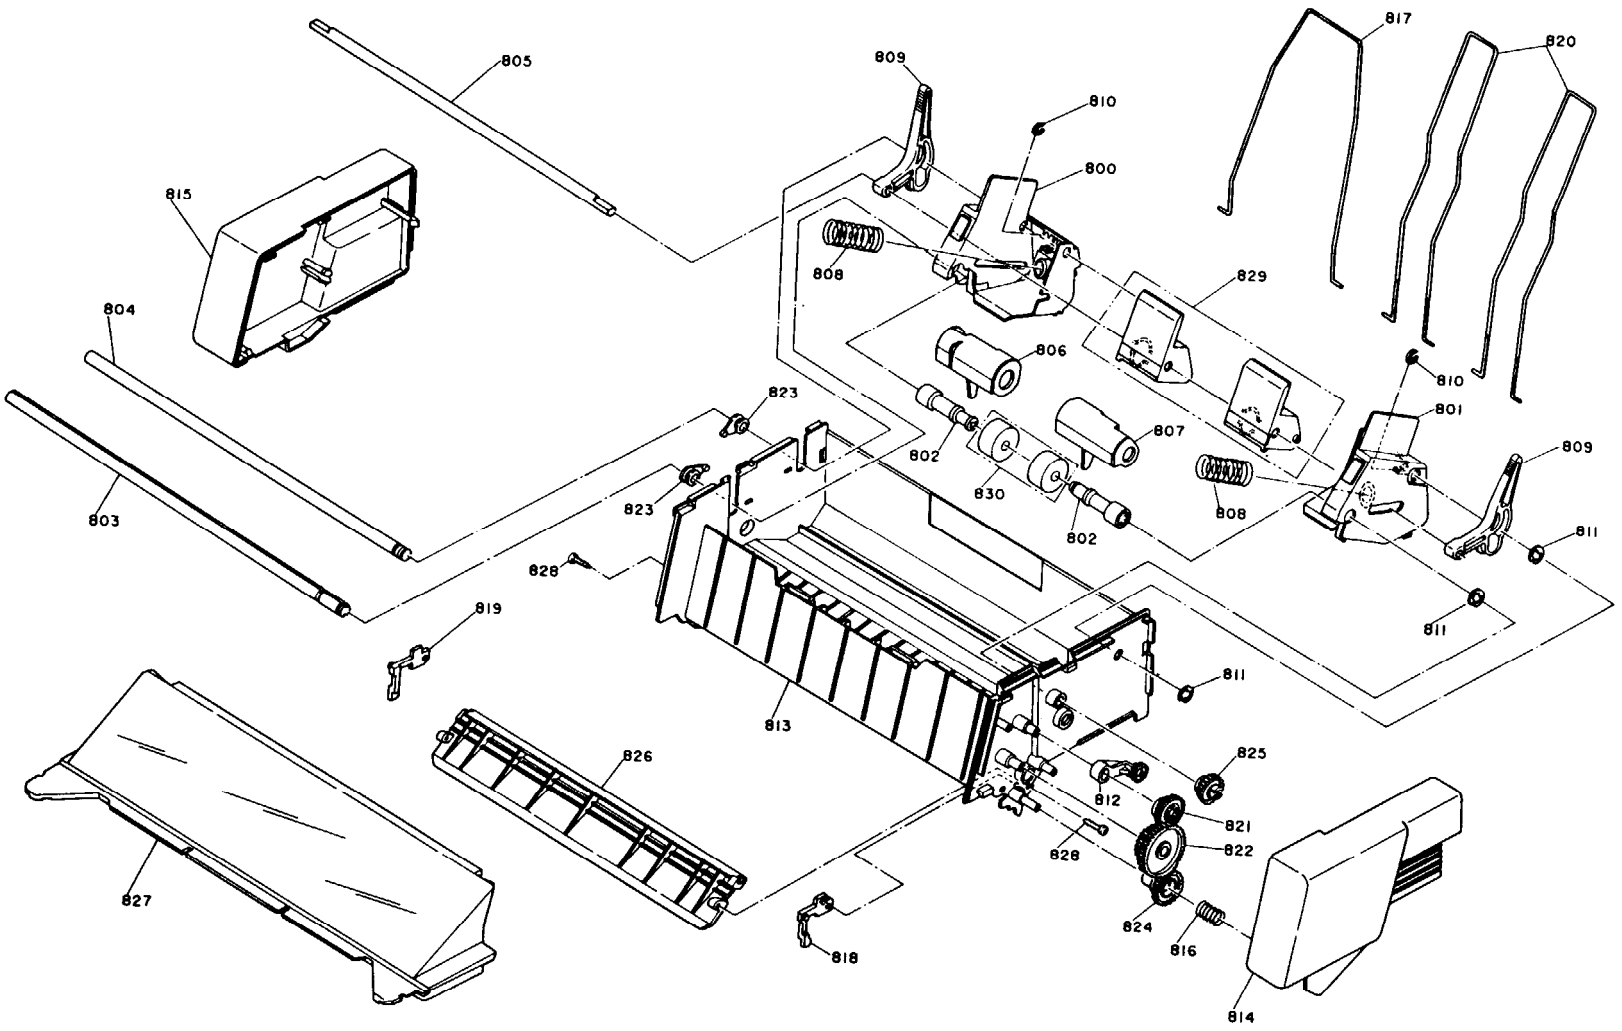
C80612 Cut-Sheet Feeder Exploded Diagram
